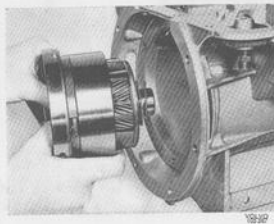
Installing center support and planet gears with needle thrust bearing and plate washer
